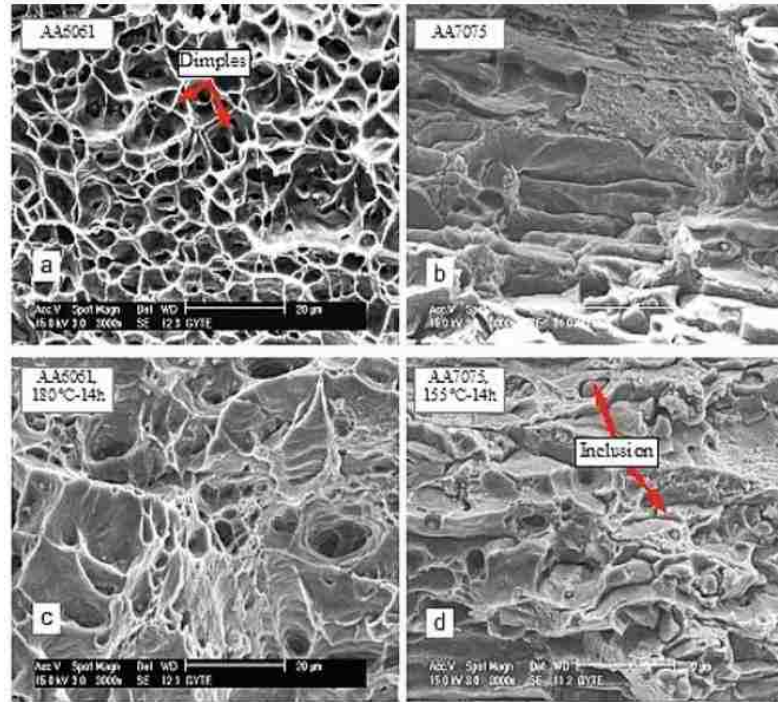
SEM images of the fractured specimen surfaces [38]
